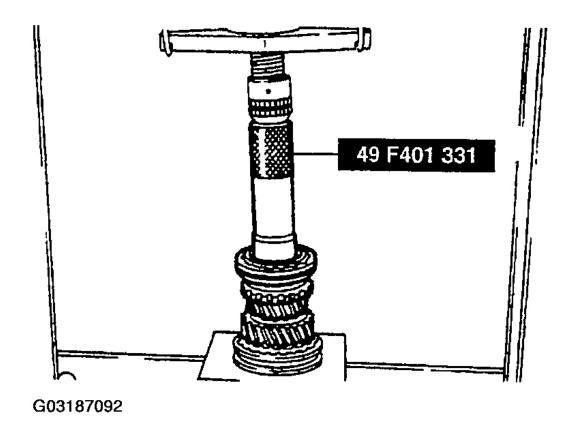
Installing 2nd Gear, 2nd Synchronizer, 1st/2nd Clutch Hub, 3rd Gear/Synchronizer Ring & 3rd/4th Clutch Hub
